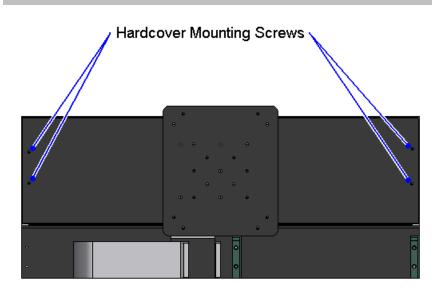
Top View of ALS20000 / ALS25000 Stage Showing Hardcover Mounting Screws
